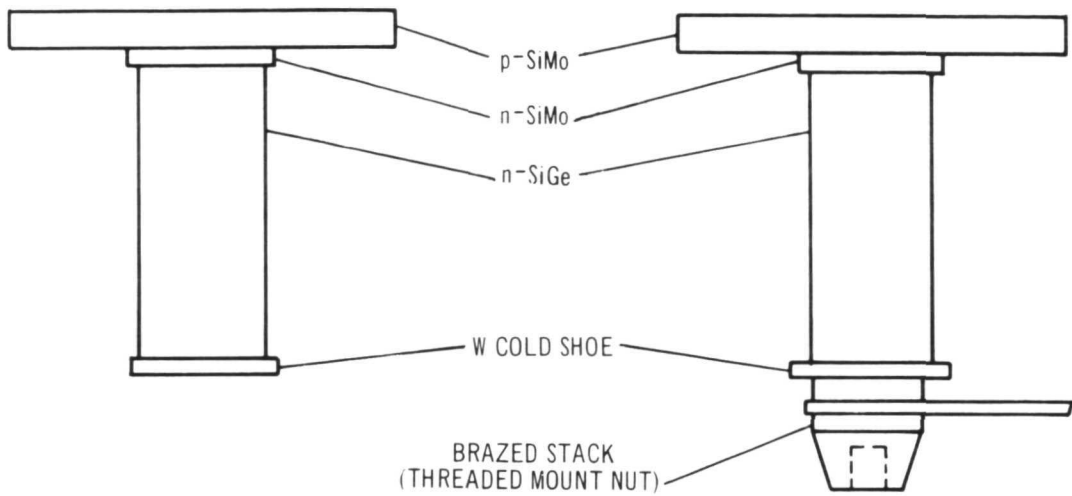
Hybrid Thermocouple Assembly - Design BX-4
